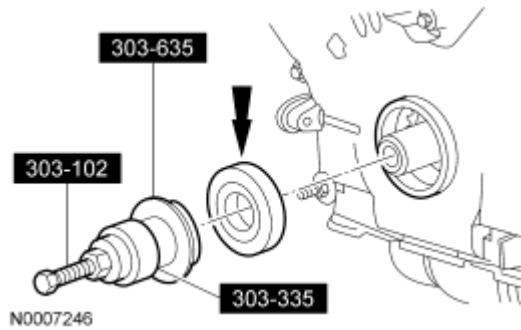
Installing Crankshaft Front Seal Using Special Tools (303-102, 303-335, 303-635)
